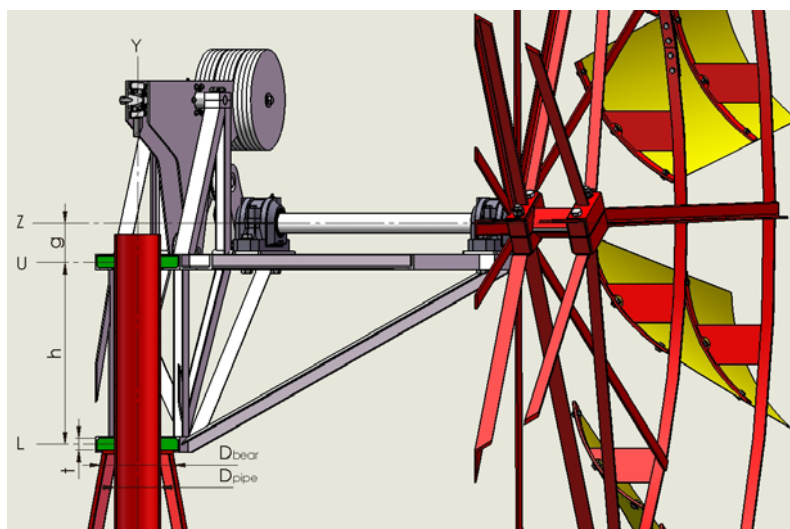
two yaw bearings, keeping head fixated around towerpipe
